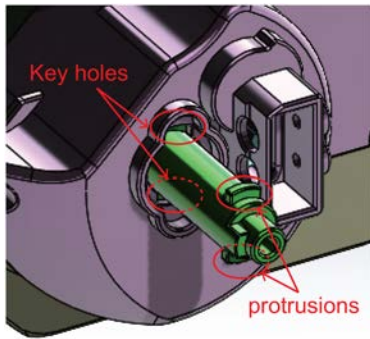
Wheel shaft is deployed through the key holes along the main body's side shield.
